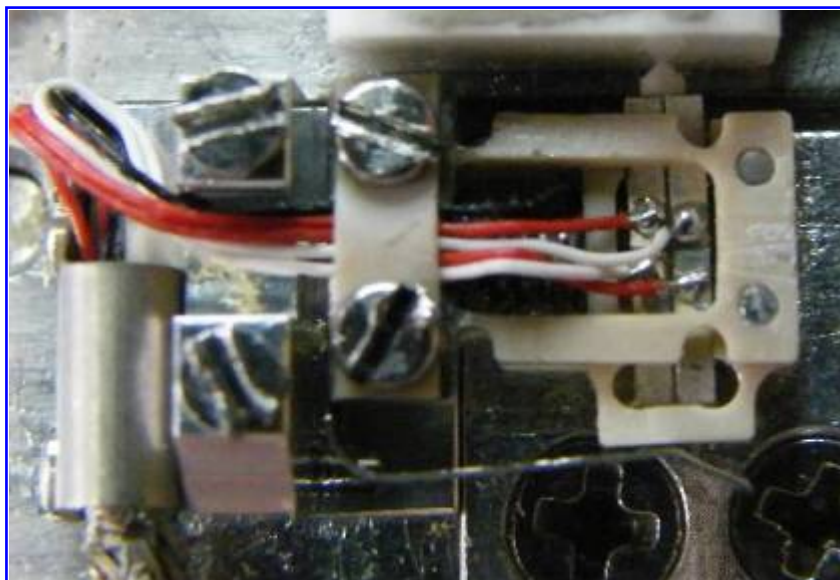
The rotated Eccenter Pin and the Leaf Spring Applies Pressure on the Element Holder
